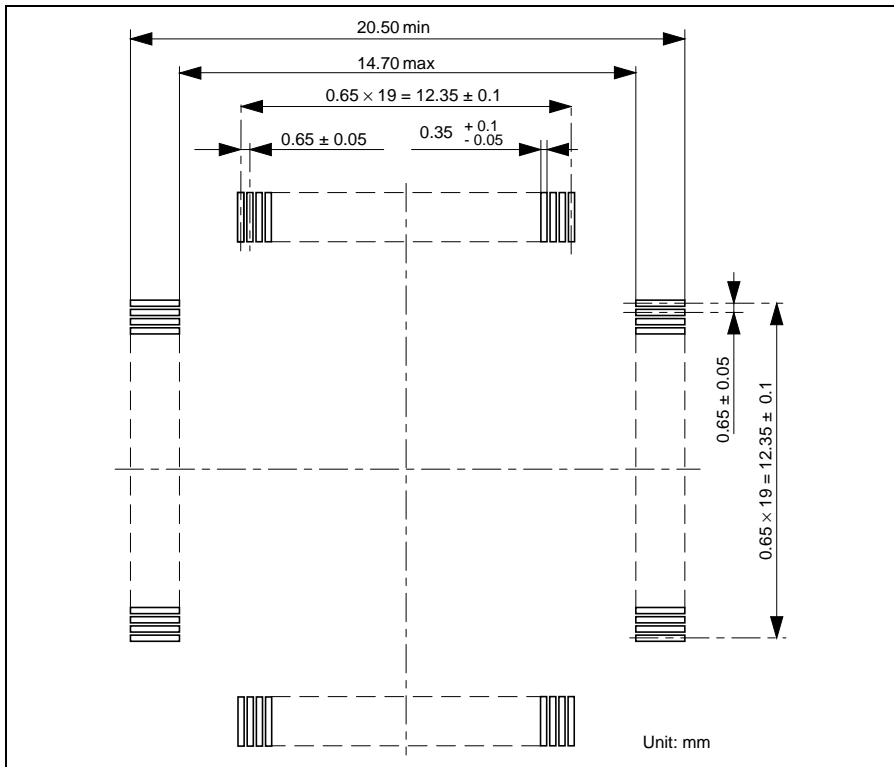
Recommended Mount Pad Dimensions of the User System IC Socket
